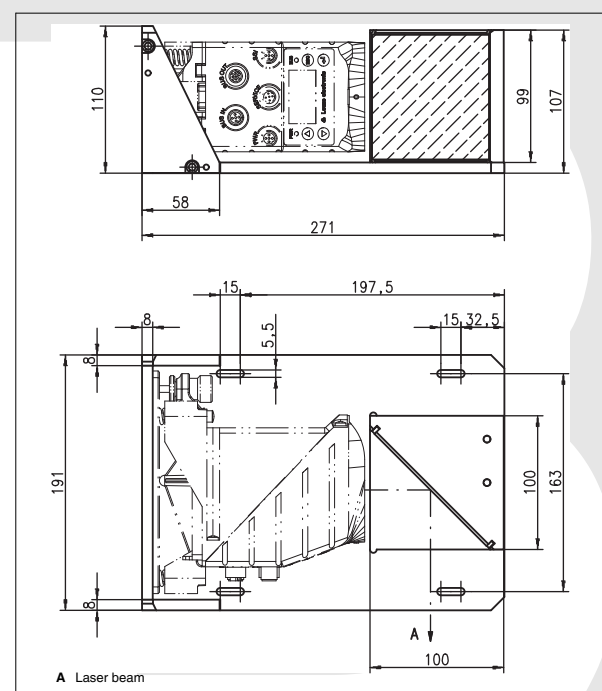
Dimensioned drawing of US AMS 01 deflector unit
